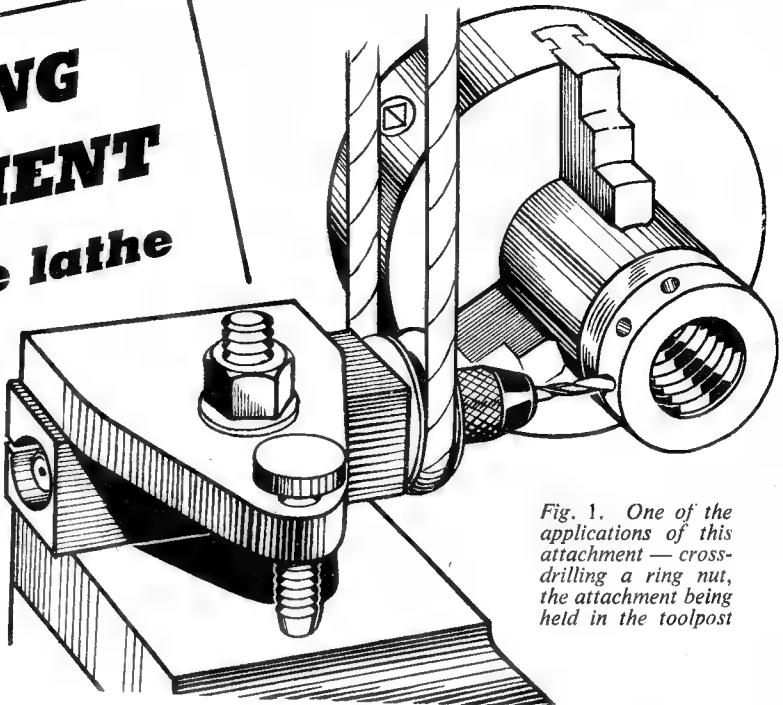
One of the applications of this attachment — cross-drilling a ring nut, the attachment being held in the toolpost
